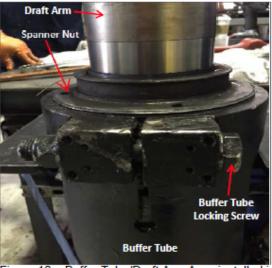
Buffer Tube/Draft Arm Assy installed in MRO shop rebuild fixture
